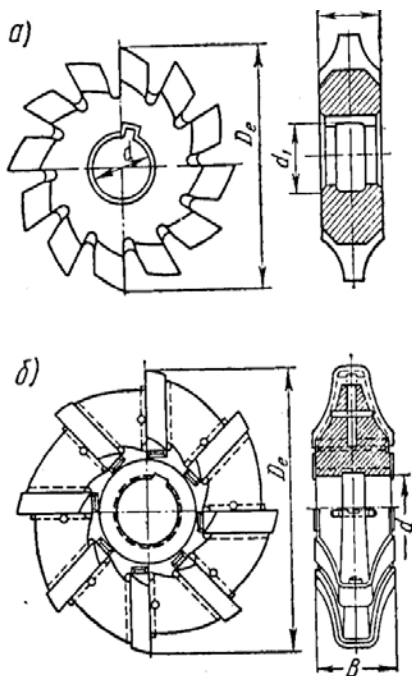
Interlocking disk milling cutters: a – one-piece construction;
